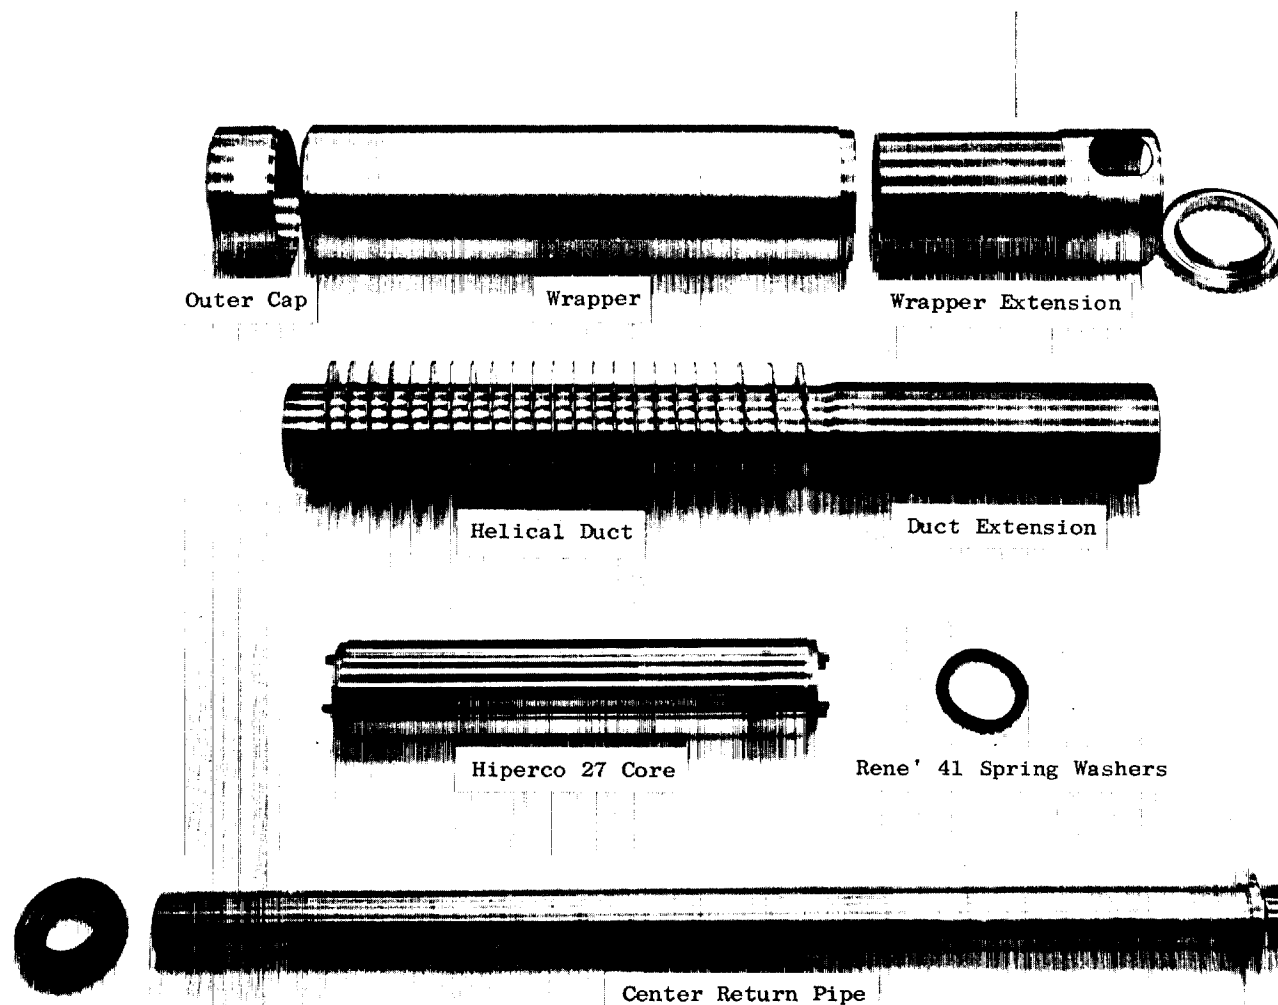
Machined Parts for the EM Pump Duct Assembly, all Made of T-111 Except the Hyperco Core (Directly Below the Helix) and the Rene' 41 Wavy Spring Washers.
